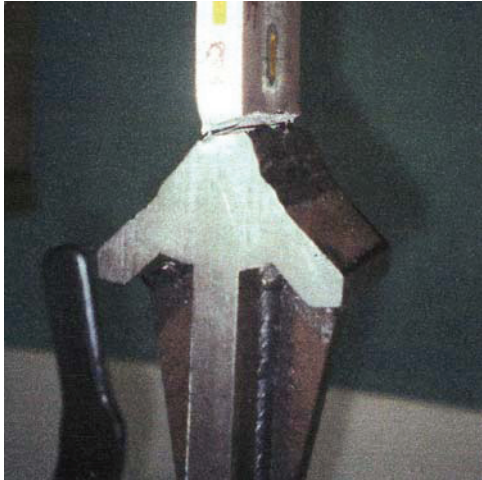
Failed specimen with inclined attachment in as-welded condition
